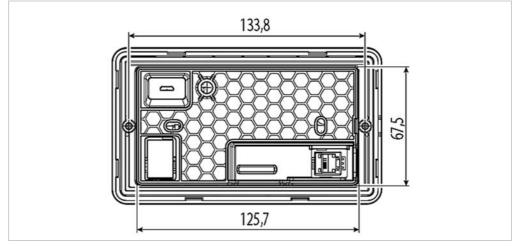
Rear view ISYteq Touch 4.0 (dimensions in mm)
